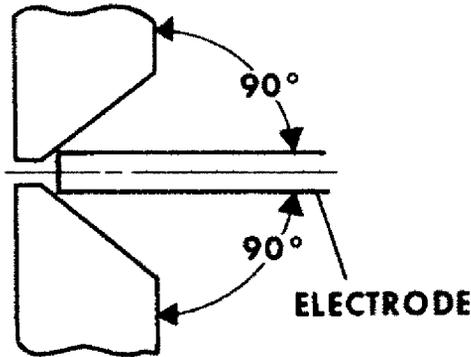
Correct electrode angle for welding the root bead in the horizontal position.
